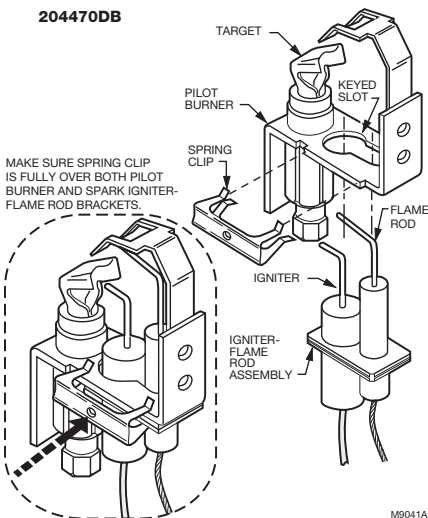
Replace Q3300 Spark Igniter-Flame Rod Assembly in keyed slot of pilot burner bracket.
